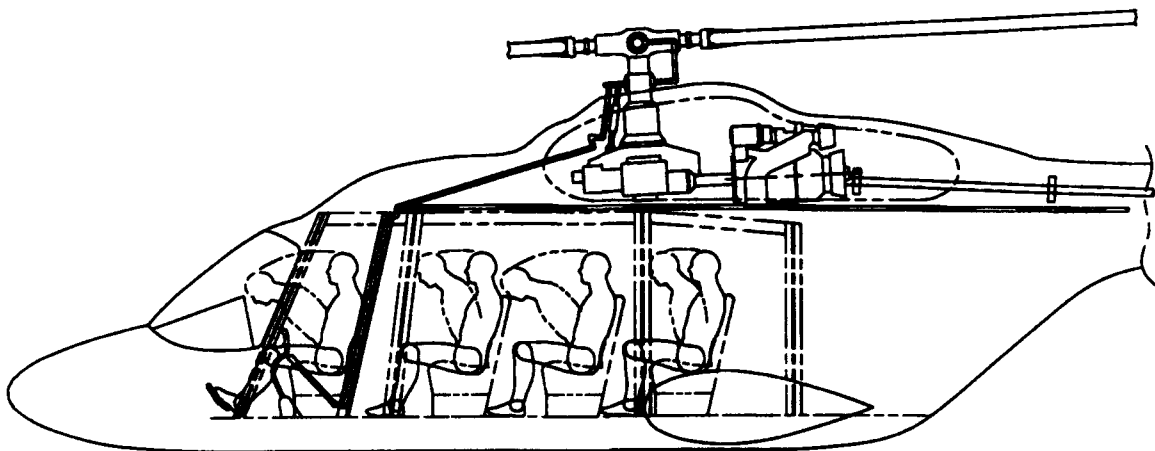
GENERIC ROTORCRAFT LAYOUT SIDE VIEW — WEIGHT CLASS C
